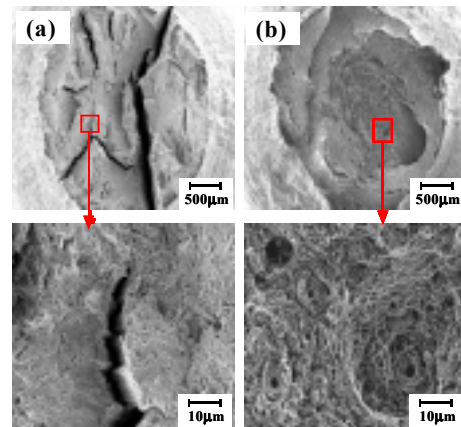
Fracture surfaces of tensile test for TWL; (a) R.T. and (b) 400 °C
